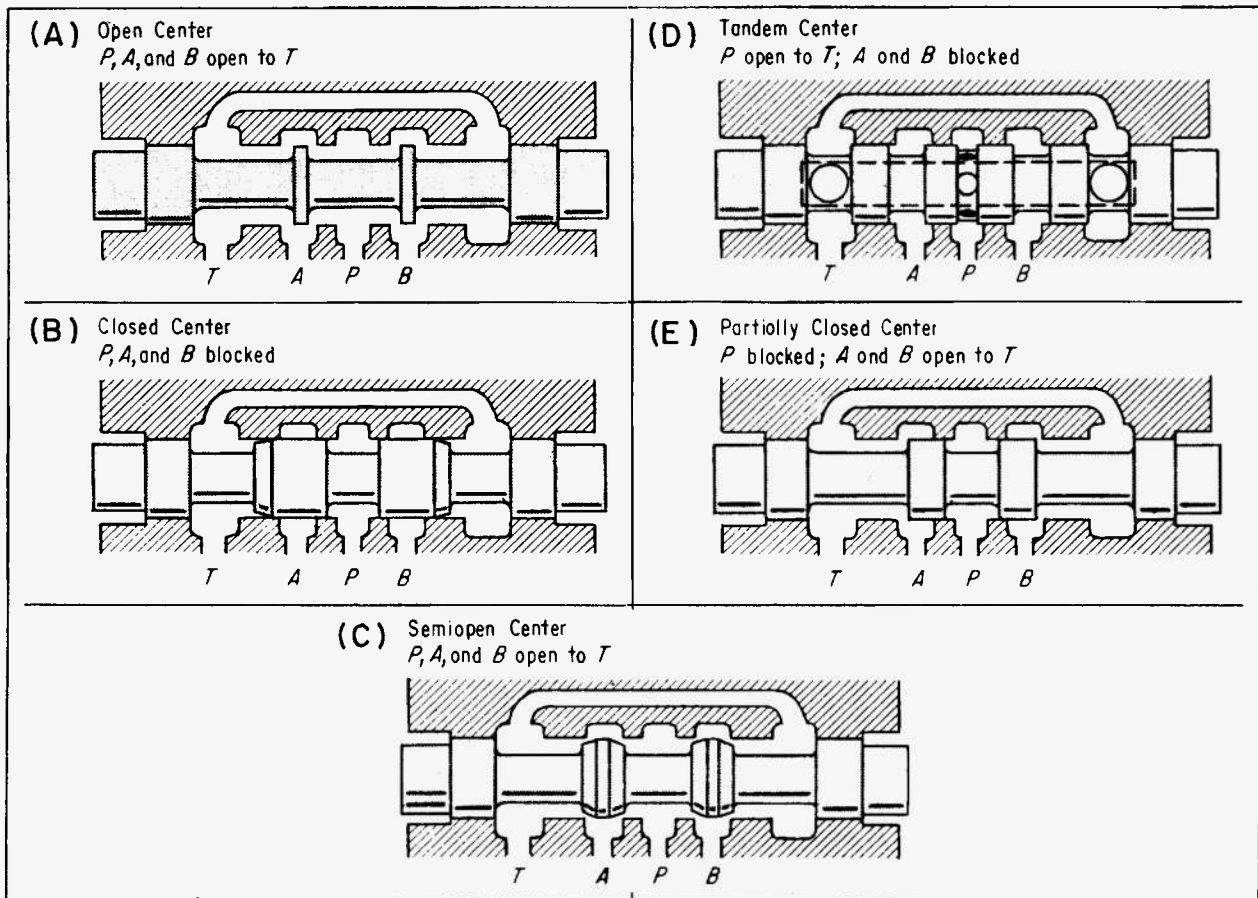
Major Types of Sliding-spool Hydraulic Valve Configurations
